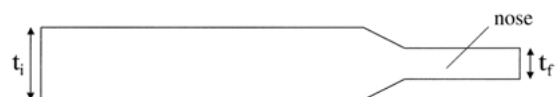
Longitudinal cross-sectional view of the billet used for roll-drawing, where t_i = initial thickness and t_f = final thickness.
